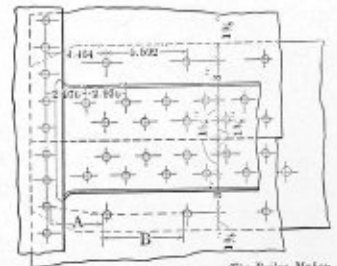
DETAIL OF SEAM SHOWN IN FIG. 52.
